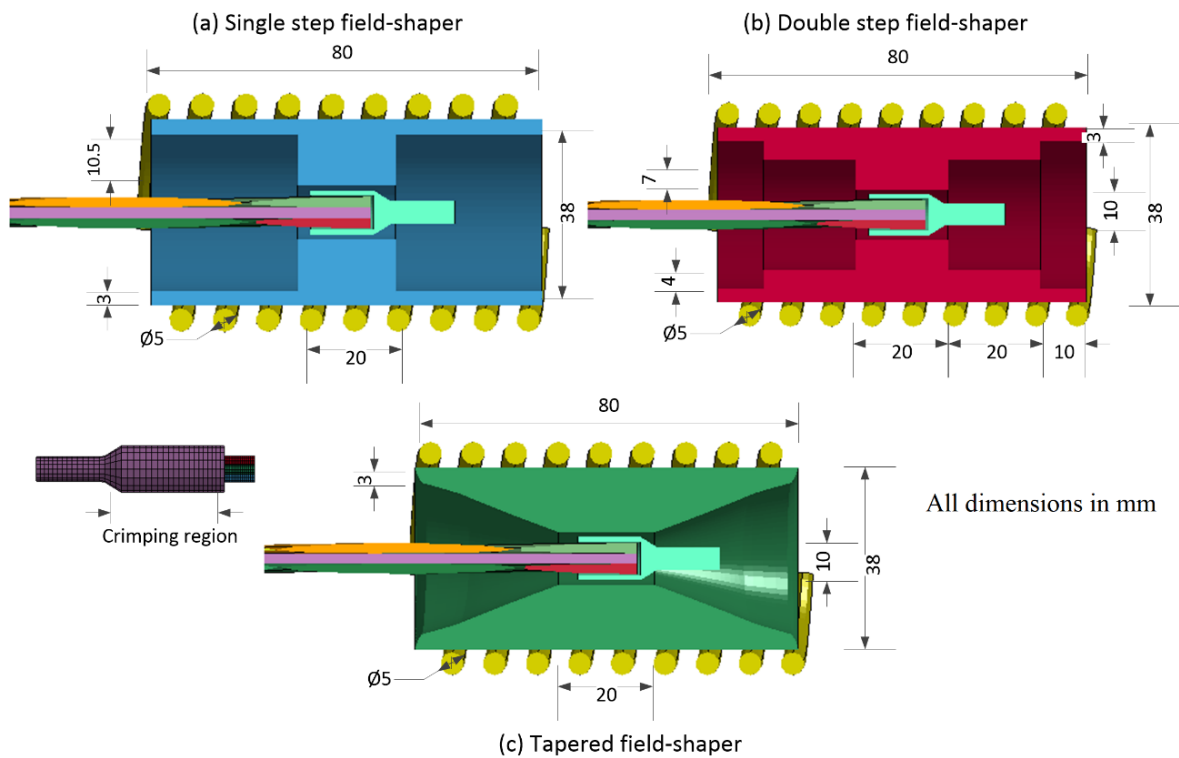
Cross-sectional view showing dimensions of (a) Single-step FS (b) Double-step FS (c) Tapered FS
